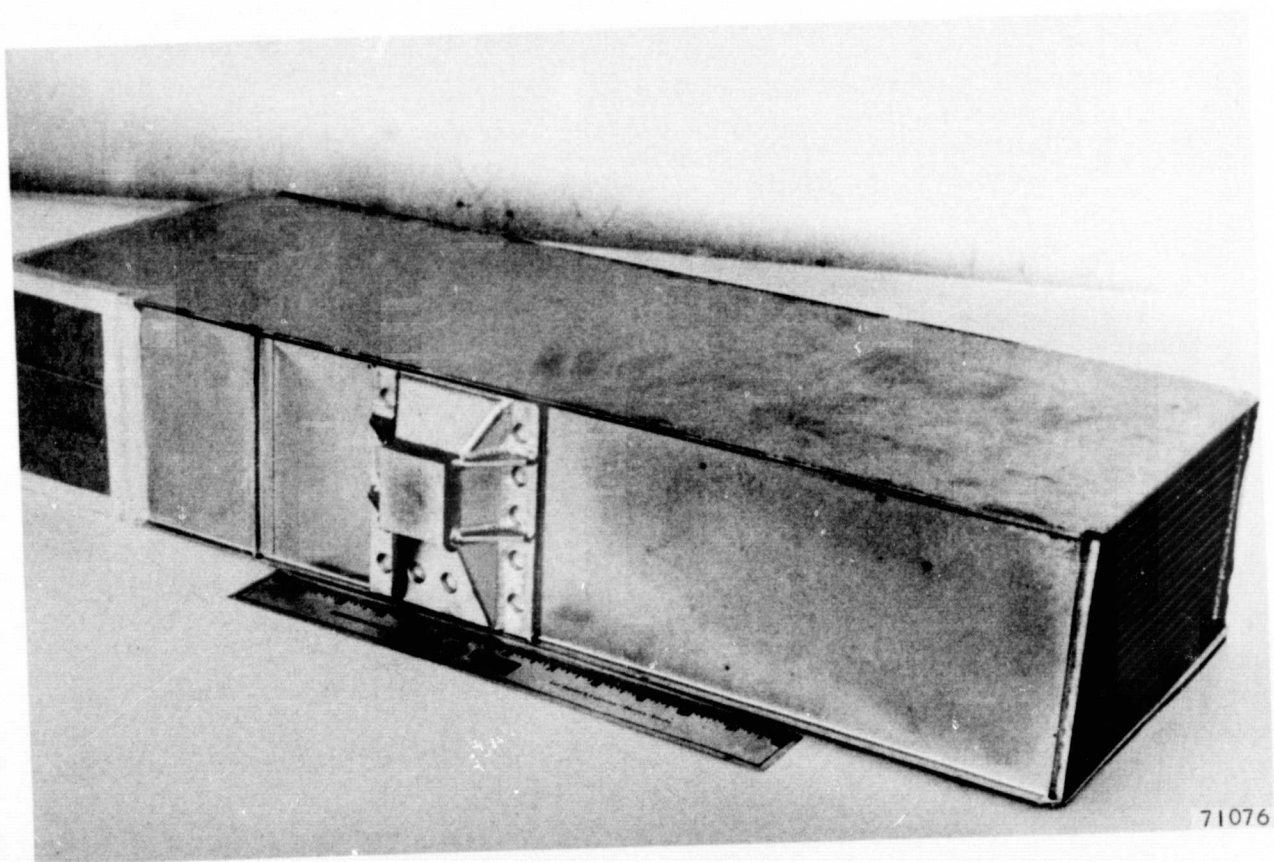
Recuperator Module After Palniro RE Step Brazing
